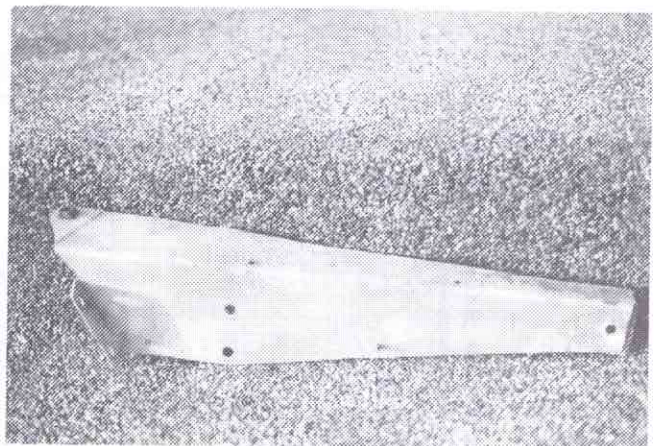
1st design aluminum bracket. This is a right side bracket.
